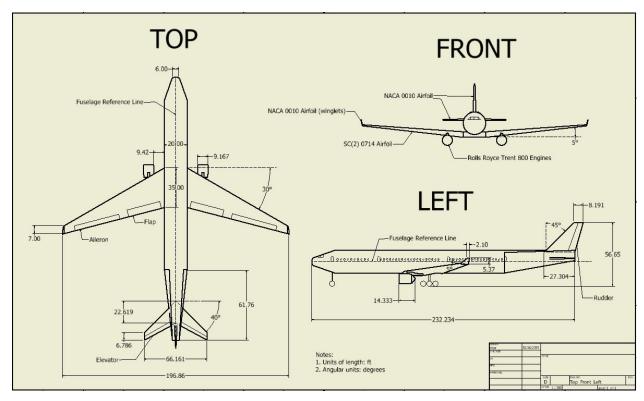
Dimensional drawing of the top, front, and left views of the aircraft
